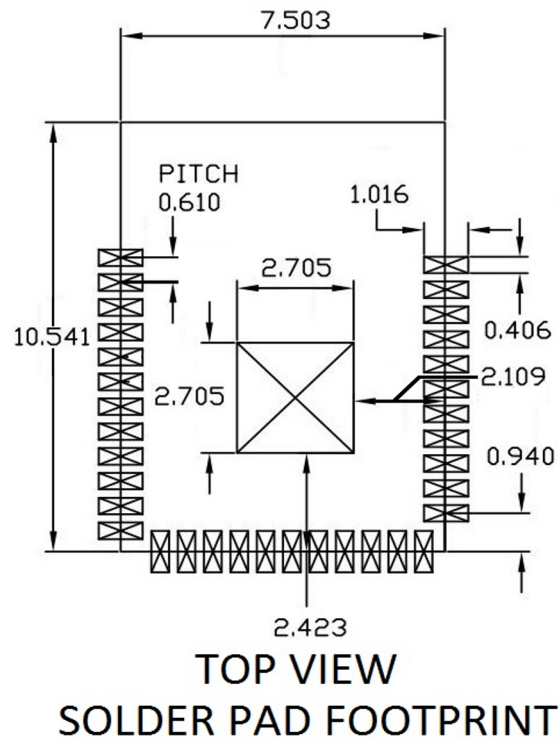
ATSAMB11-ZR210CA Module Package Outline Drawing
